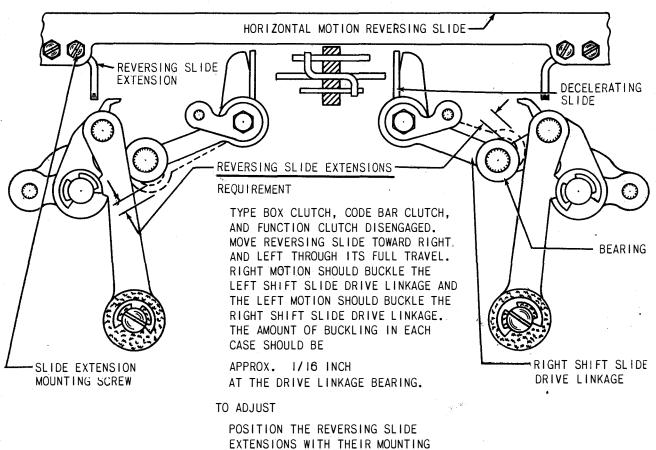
Automatic Typer, Horizontal Motion Reversing Mechanism
